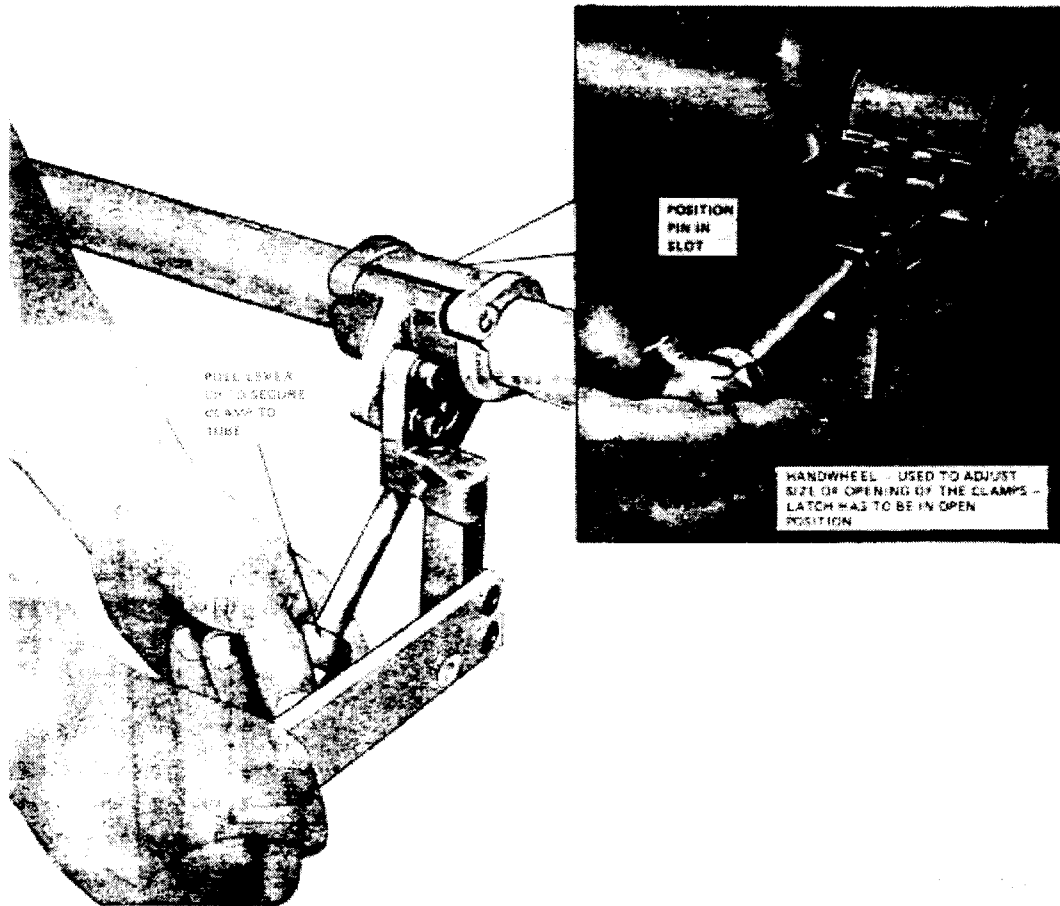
Installing Traverse Mount Assembly on Support Tube
